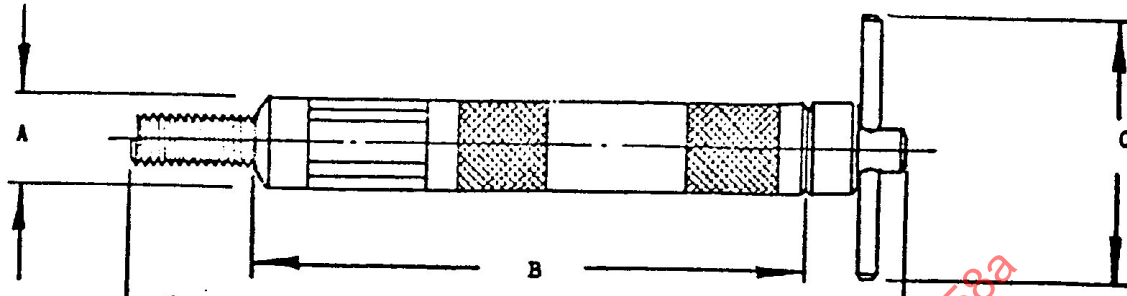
Class 1 Style a, , prewinder inserting tools, with threaded mandrel for spark plug threads
